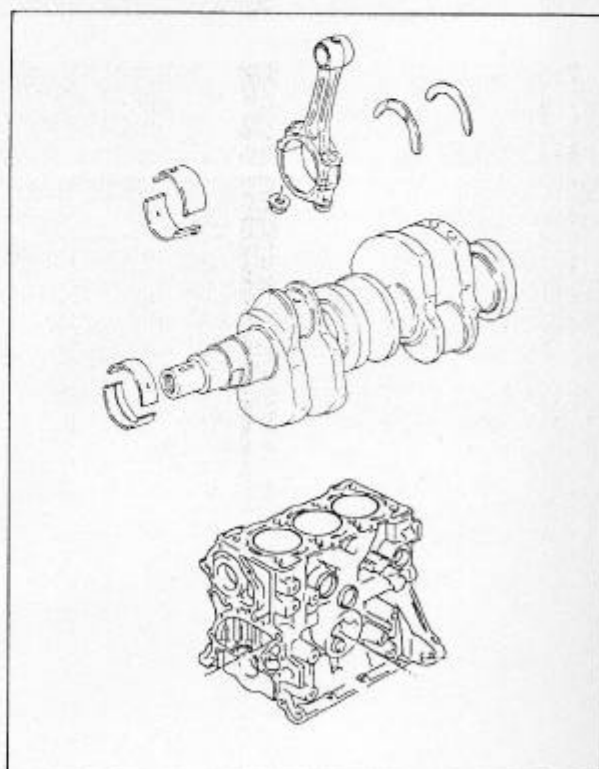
A — 4 CYLINDER BLOCK, CRANKSHAFT, CONNECTING ROD
